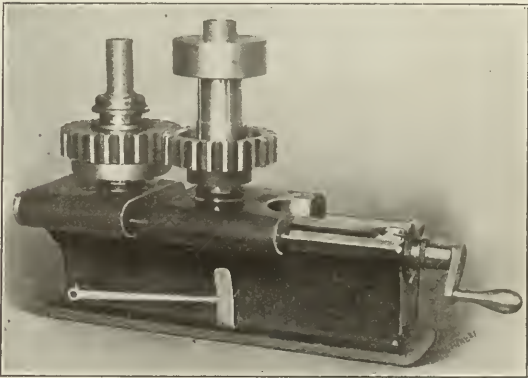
Fixture for testing Pitch Diameter and Concentricity of Spur Gears
